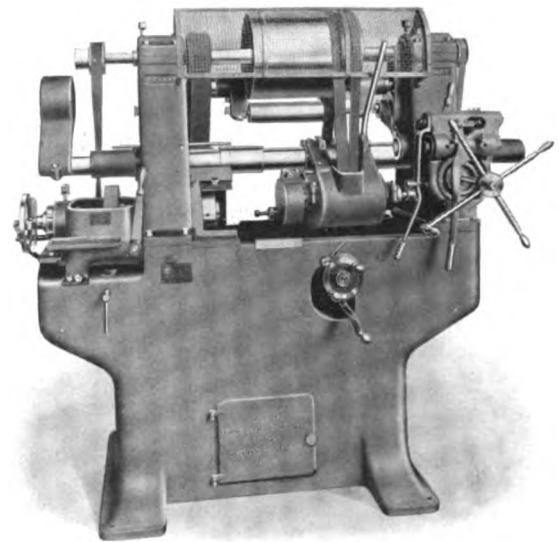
Bryant No. 15-A Semi-Automatic Hole and Face Grinder. Motor Drive Self Contained
